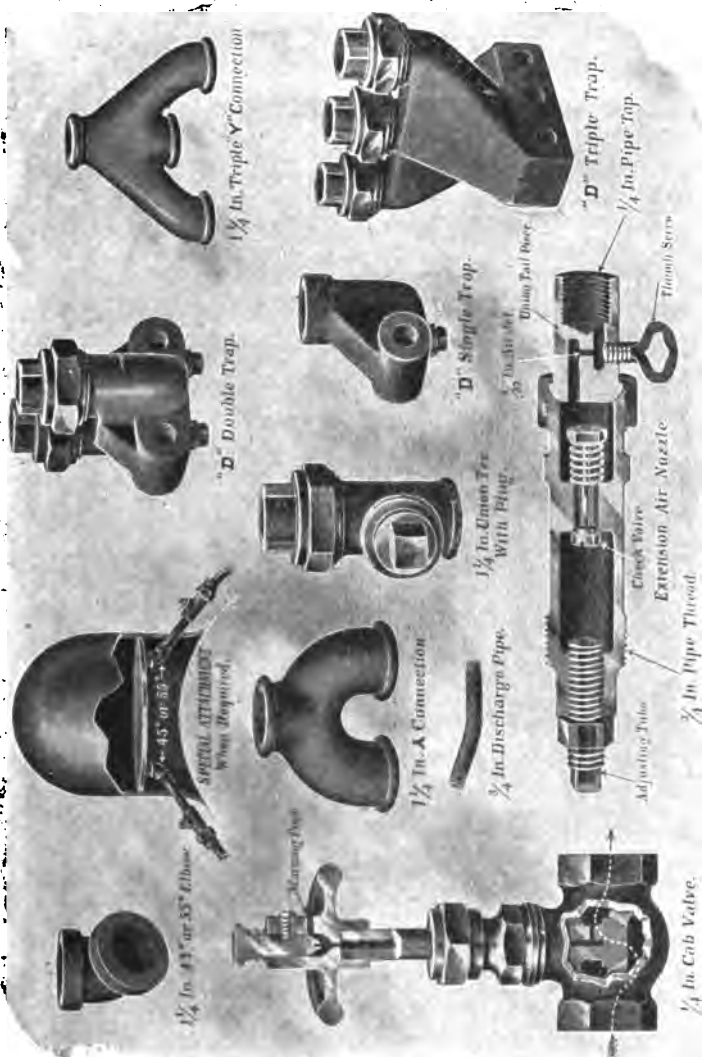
DETAIL PARTS LEACH "D" SANDERS.
